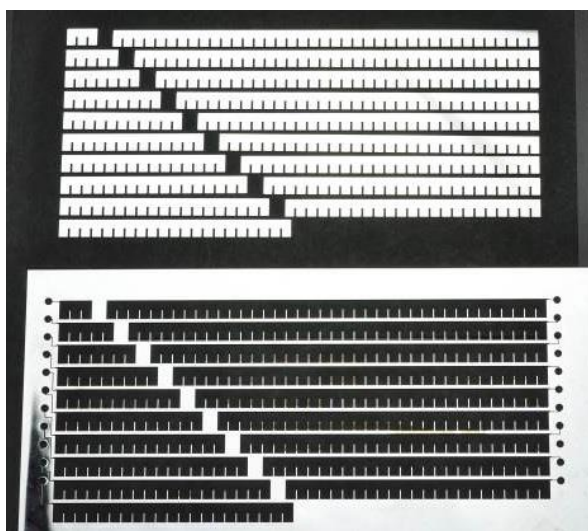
Stainless steel mirror that was cut out to comb-shaped by wire-electrical discharge machine.
